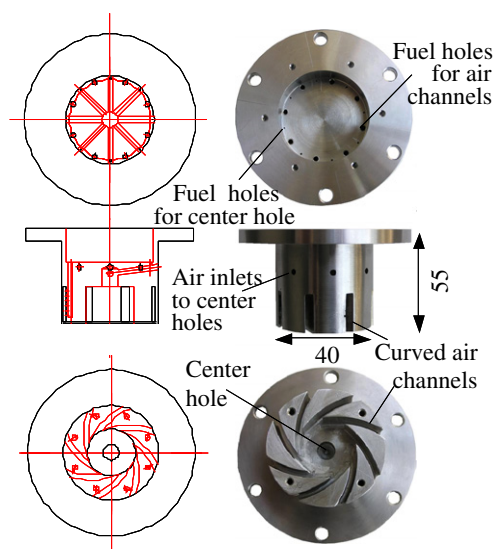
Schematic drawing (left) and photo (right) of mixture injection nozzle.
